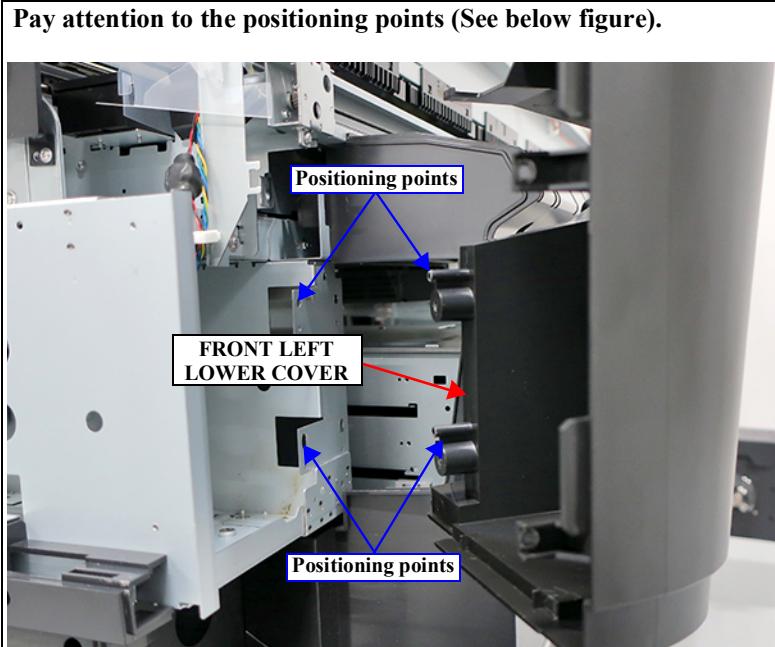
Removing the FRONT LEFT LOWER COVER
